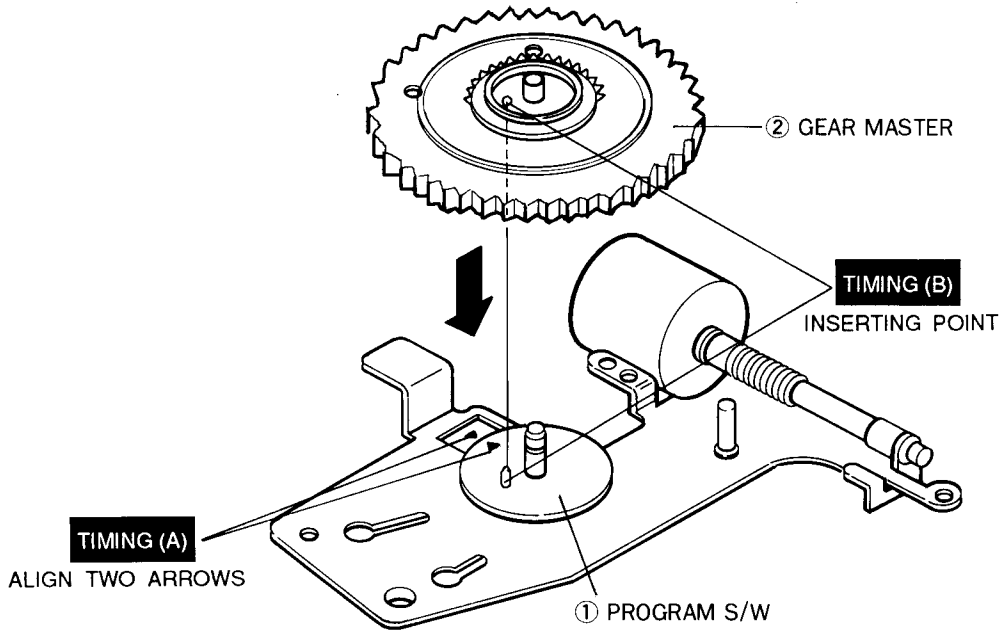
Reassembly and Timing of Program S/W & Gear Master
